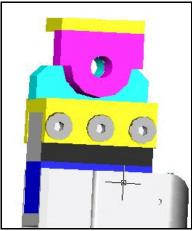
Lower Pitch Mechanism to T12 Load Cell
